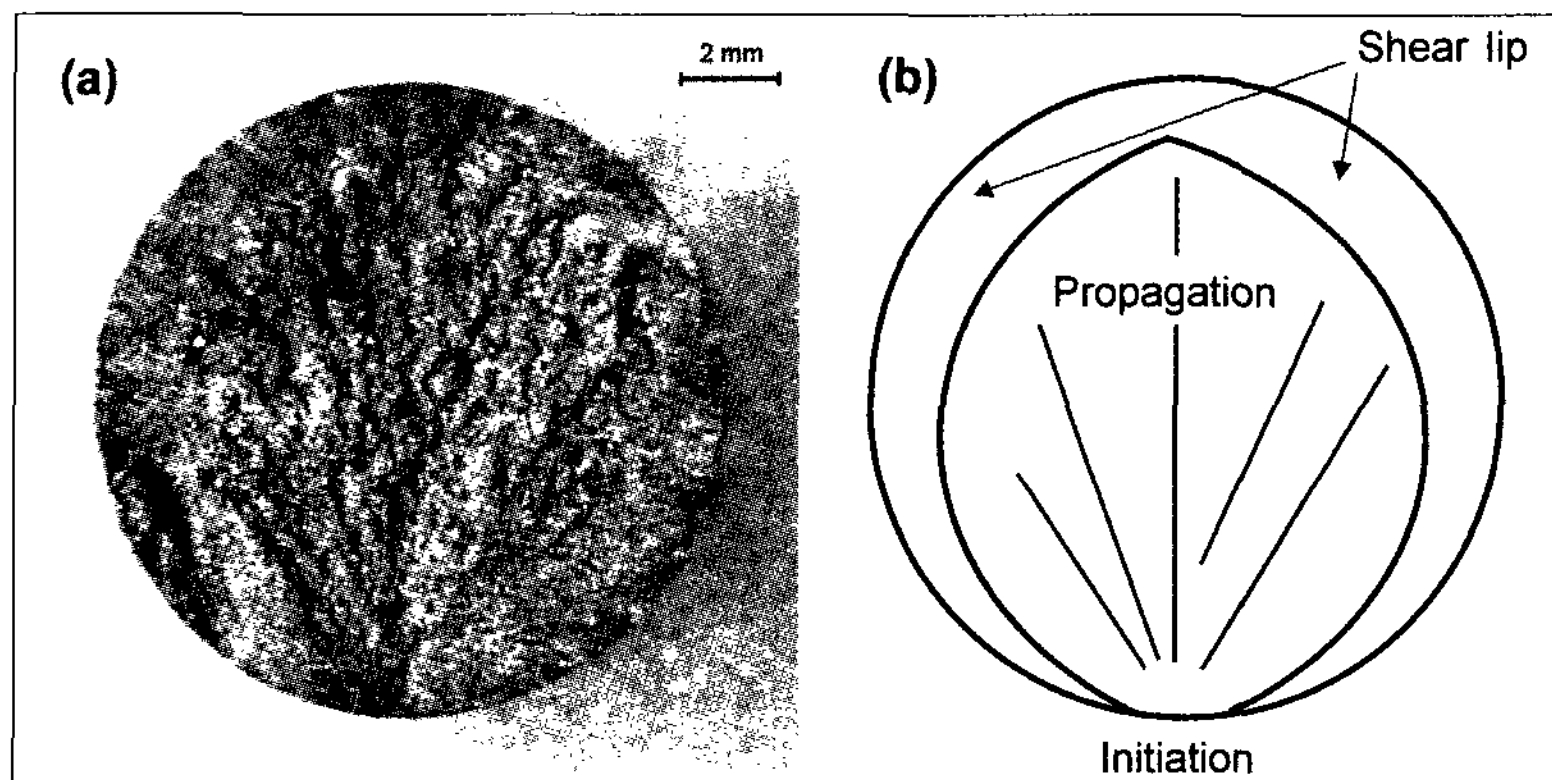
(a) Fracture surface and (b) schematic drawing of the fracture surface of the Cu-10Al-5Ni-5Fe alloy casting
